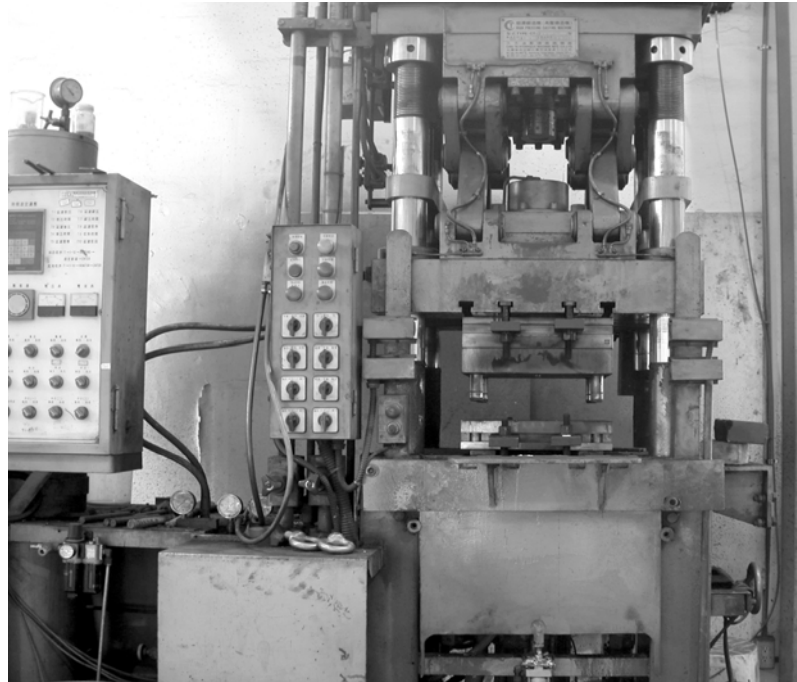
Oil-hydraulic pressing machine used for powder consolidation and squeeze casting.
